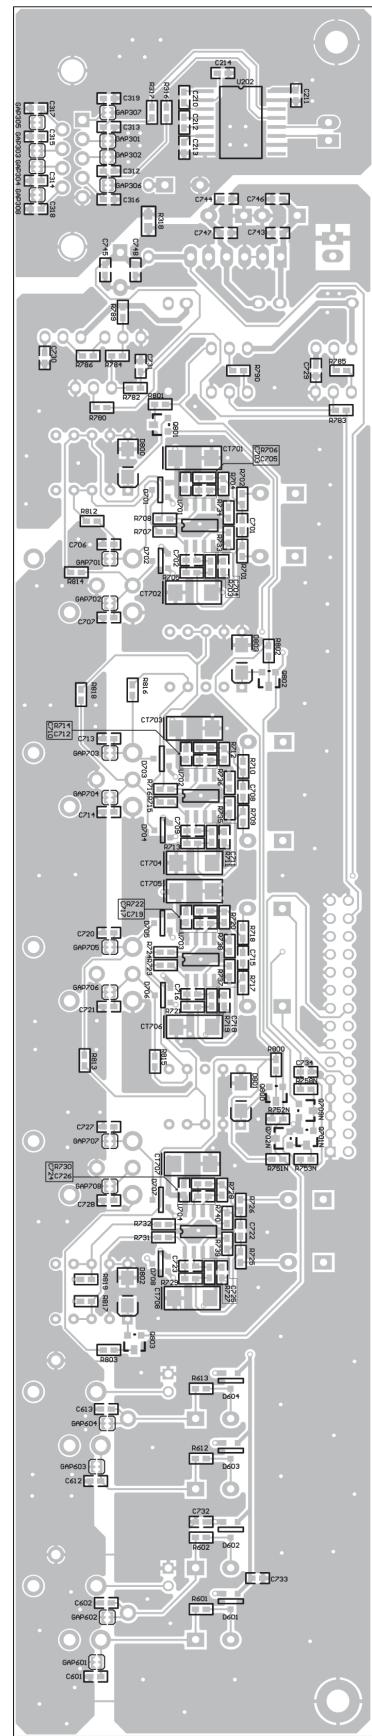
Input/Output PCB Bottom Etch and Component Layout
